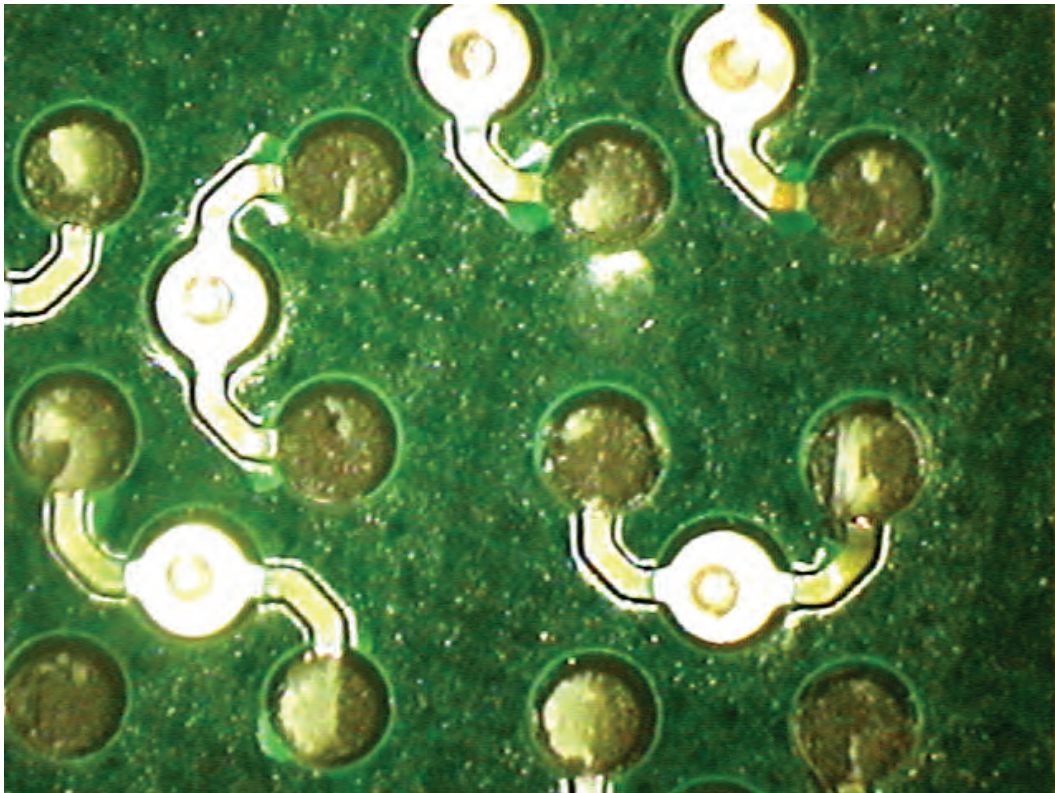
BGA U4 with Missing Pads (SnPb Solder/SnPb Balls)
